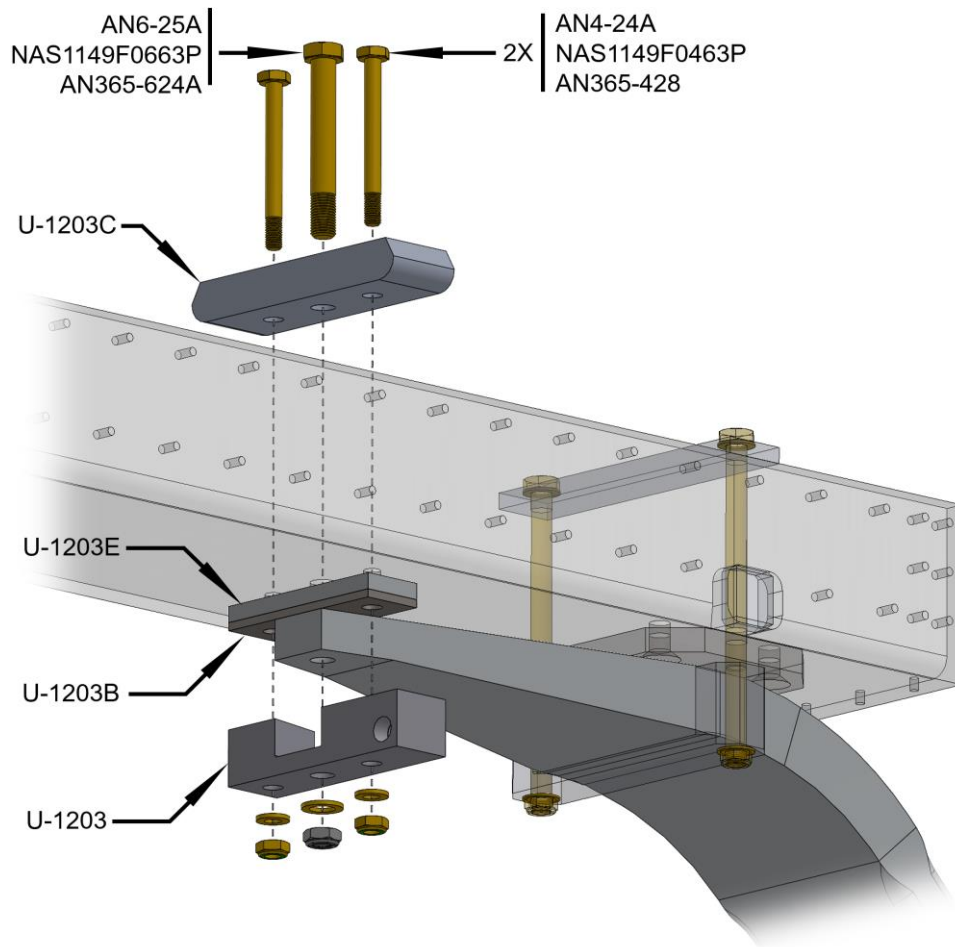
INSTALLING THE INBOARD ATTACH BRACKET (RIGHT SIDE SHOWN)
